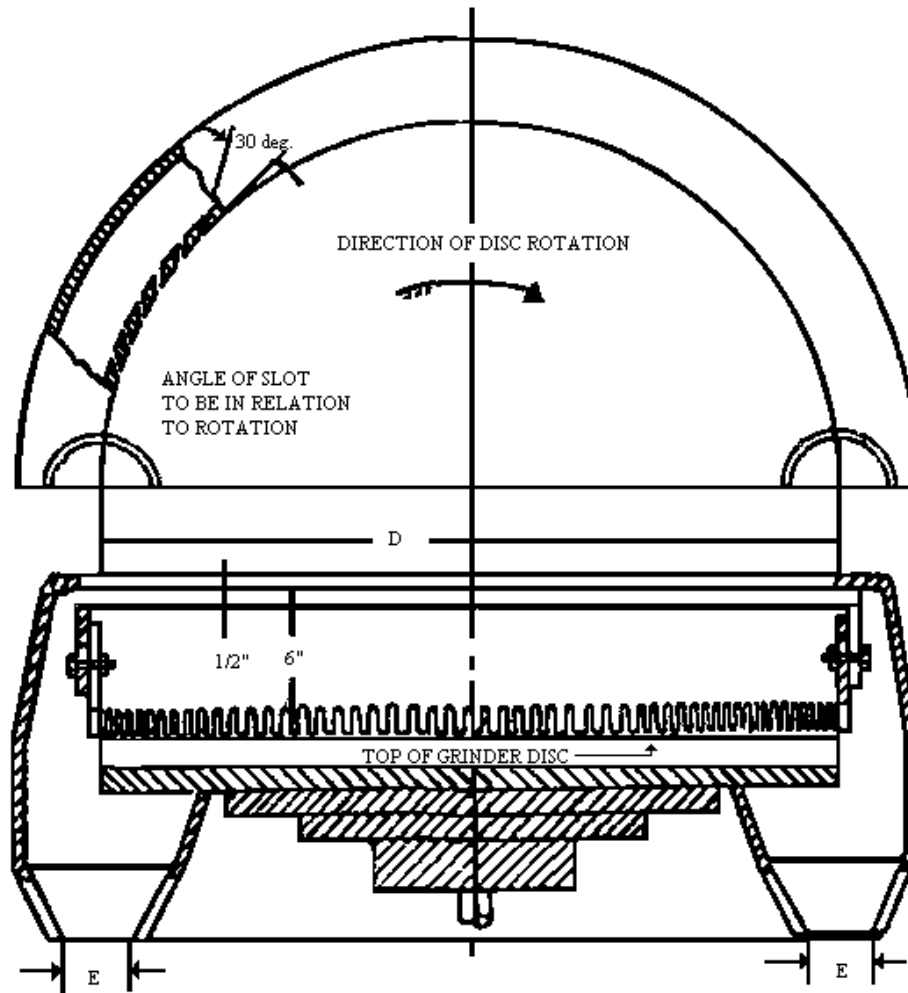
Vertical Spindle Disc Grinder Exhaust Hood and Branch Pipe Connections
